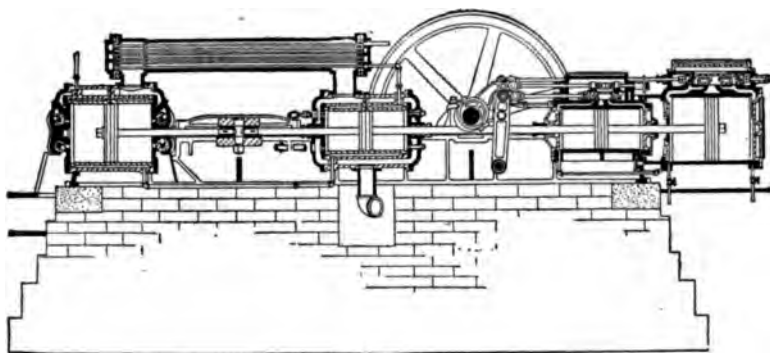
Tandem compound steam and two-stage air compressor straight-line type.
